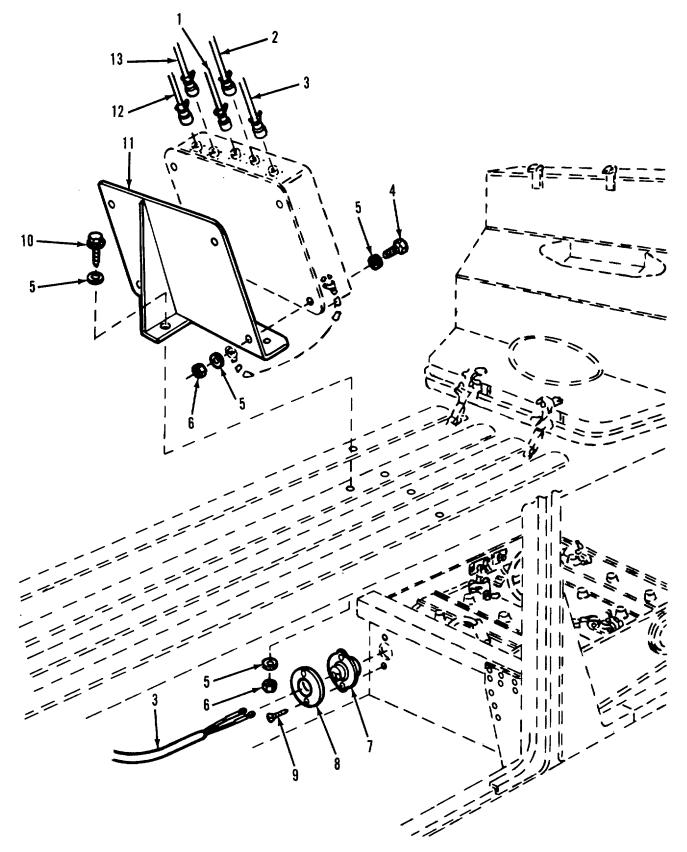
M284 Smoke Generator Mounting Kit (Control Panel Assembly Mount and Cable Assemblies).
